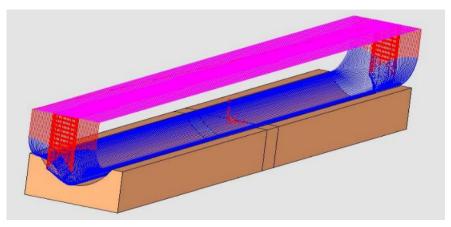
Diamond tool finish-machining in line milling (for higher depths/widths).
